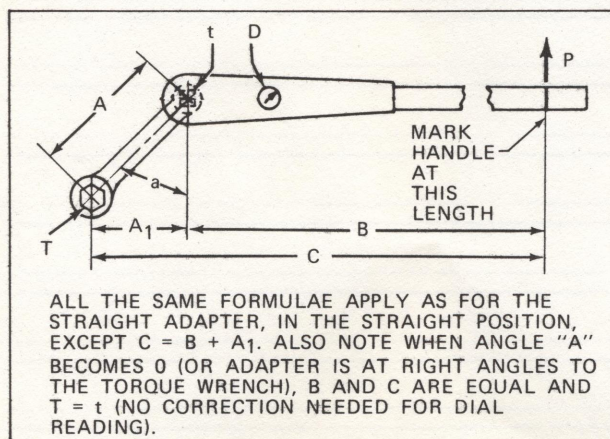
TORQUE WRENCH WITH ADAPTER APPLIED AT AN ANGLE.
